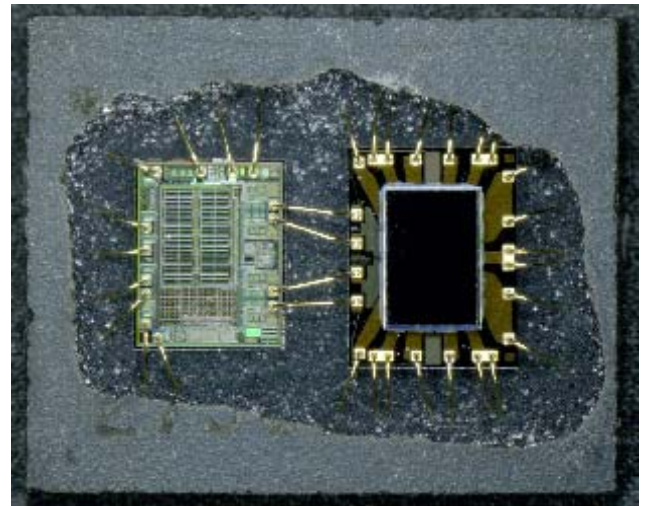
[ADGM1304](#) LFCSP Package with Molding Compound Partially Removed to Show MEMS Switch Die (Right), Controller Die (Left), and Associated Wire Bonds
